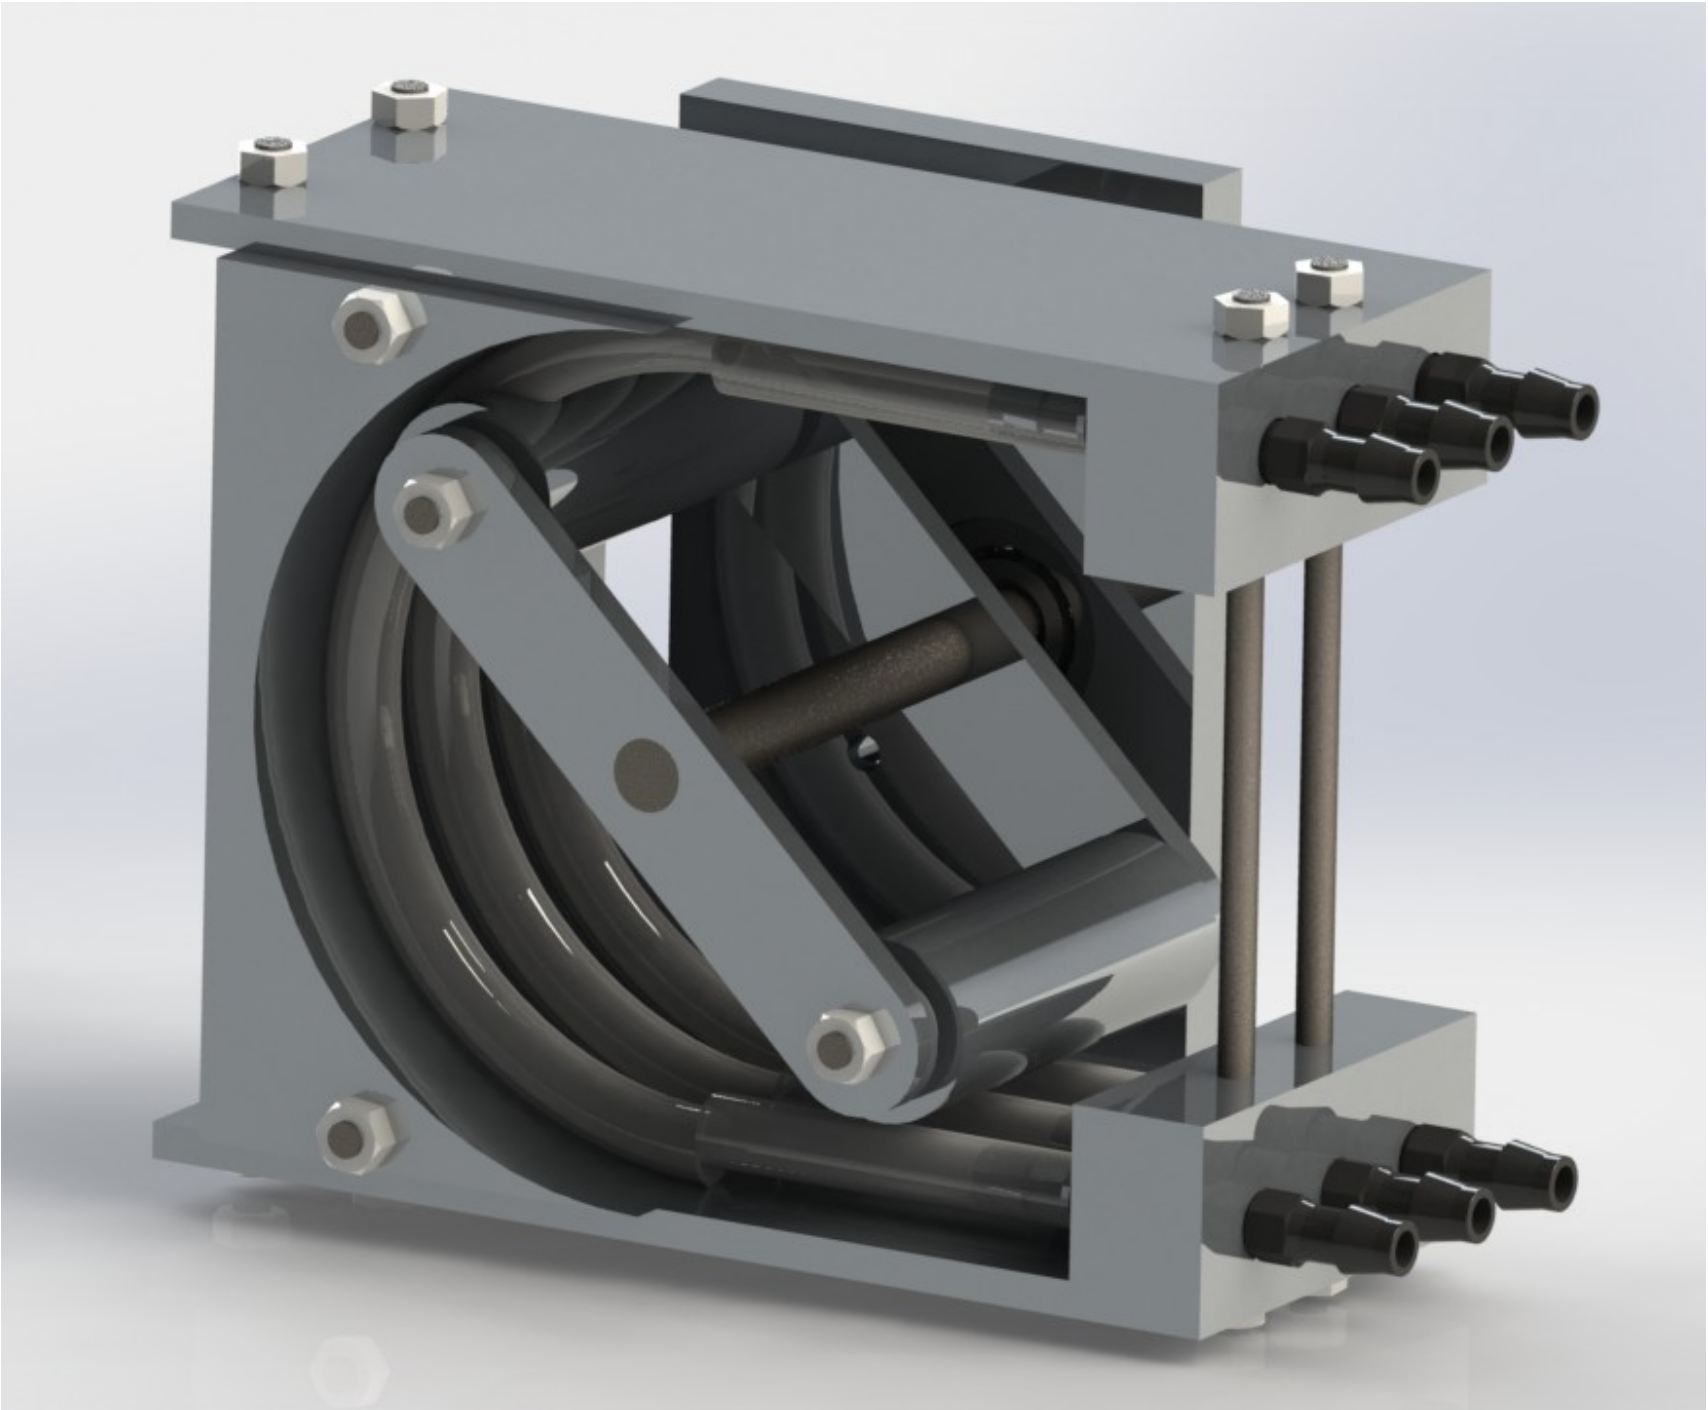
final Assembly*. This is a drawing of our assembly. It fits in the 14 by 14 by 14 box as required as you can see.
